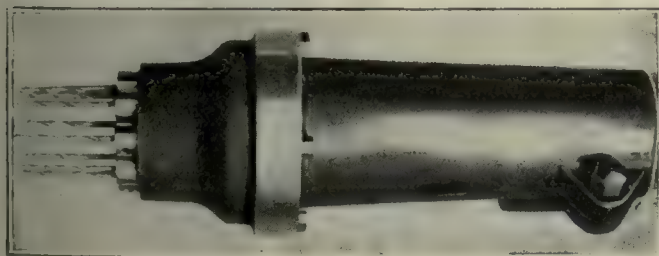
EIGHT-SPINDLE, FIXED-CENTER DRILLING HEAD
